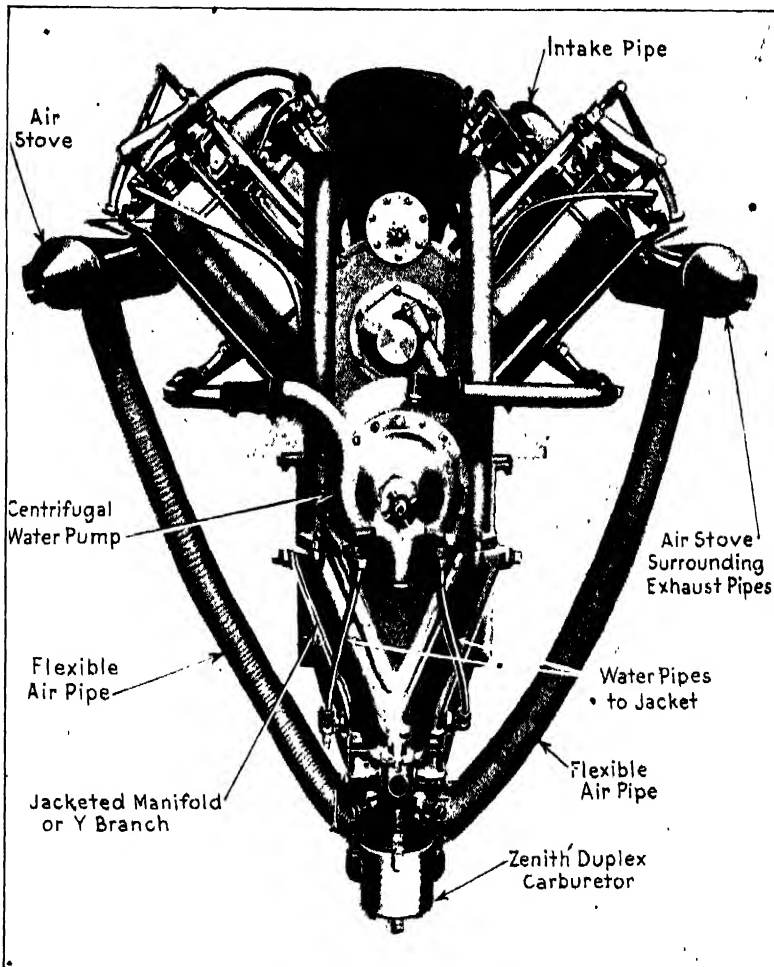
Rear View of Curtiss OX 2 90 Horsepower Airplane Motor Showing Carburetor Location and Hot Air Leads.
